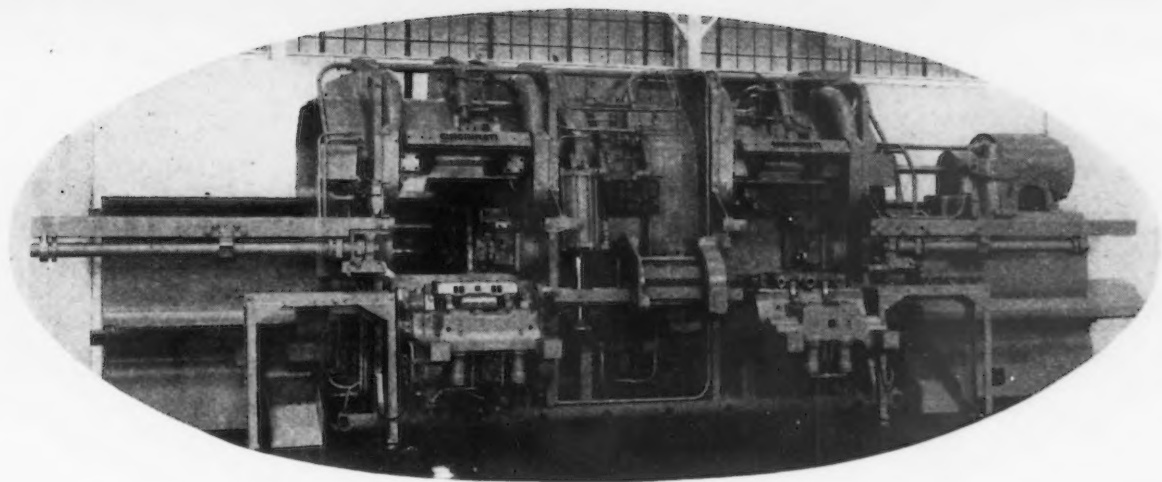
The new mill-broach combines milling and broaching to finish cylinder heads in one continuous cycle.
